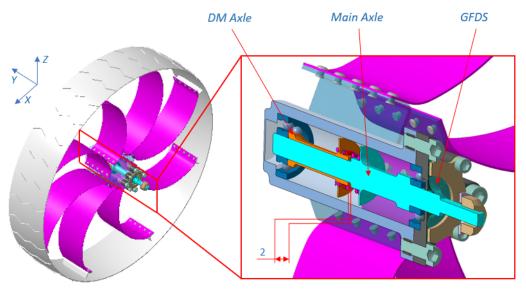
Cross-sectional view of the wheel hub, showcasing an integrated dust sweeper and a redundant Y-axis damper mechanism
